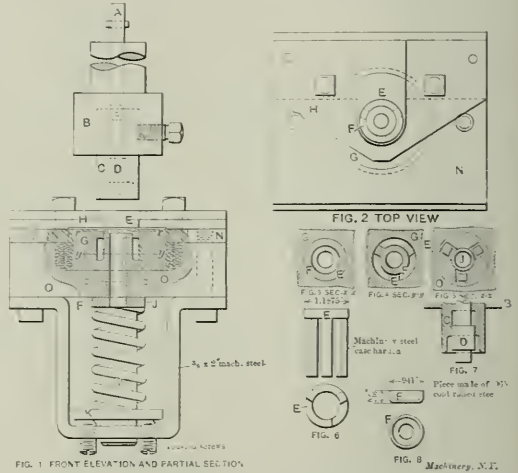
FRONT ELEVATION AND PARTIAL SECTION.
